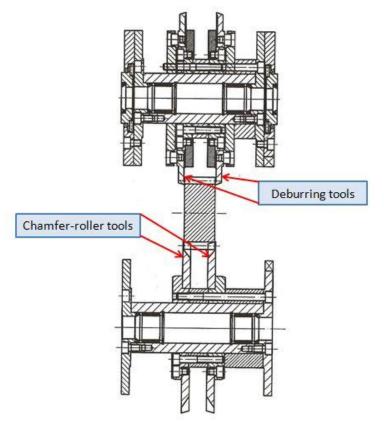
Head with chamfer-roller tool and head with deburring tool alone
